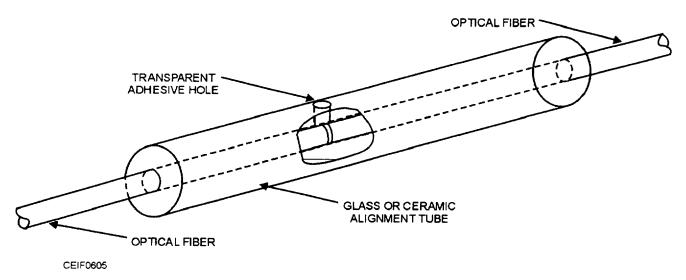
A glass or ceramic alignment tube for mechanical splicing.
